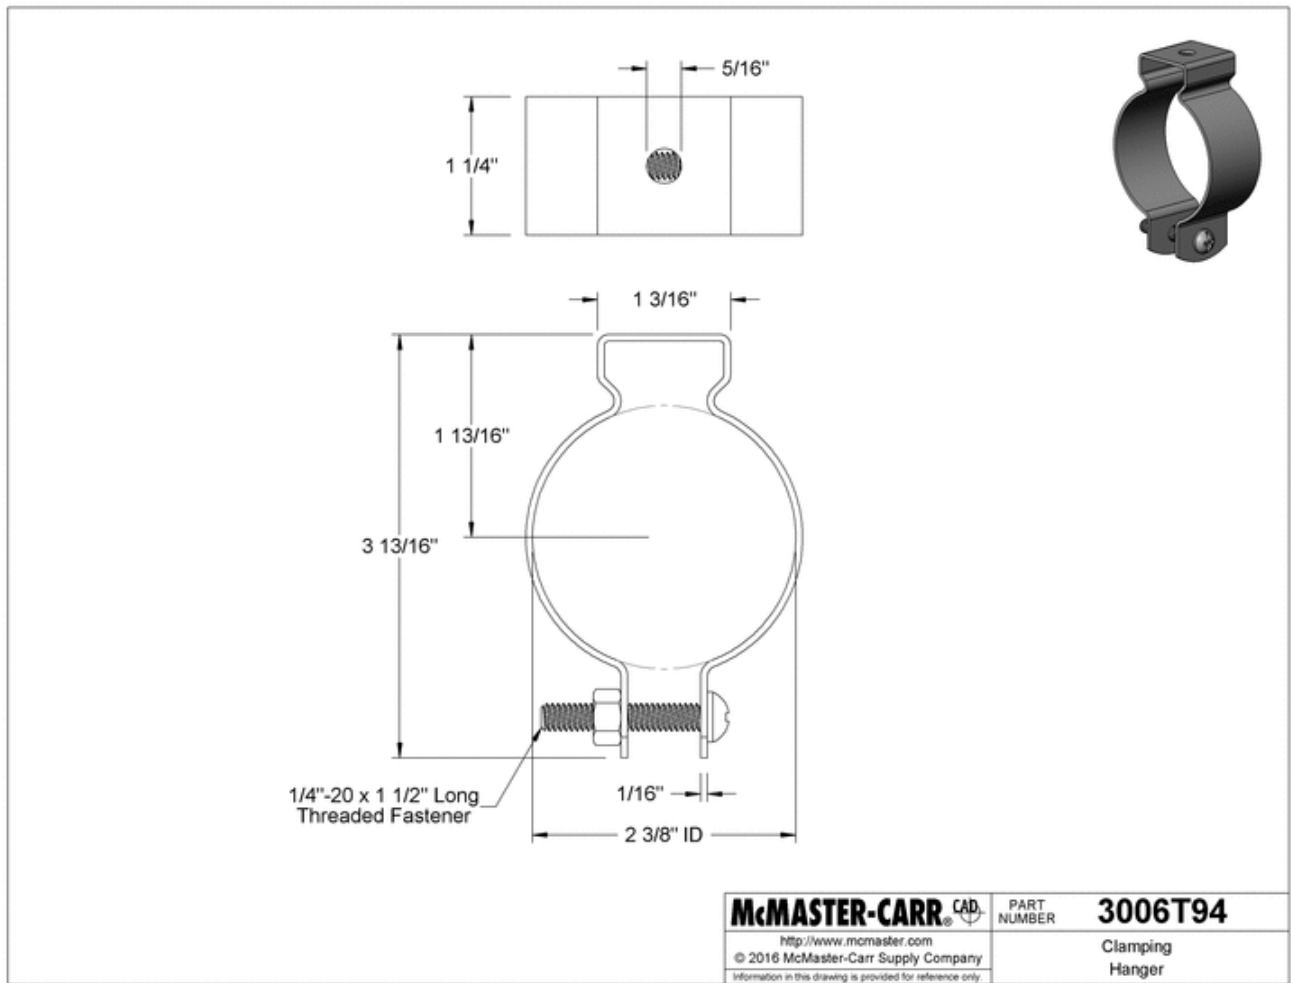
Metal Clip for Attachment Engineering Drawing [28]
